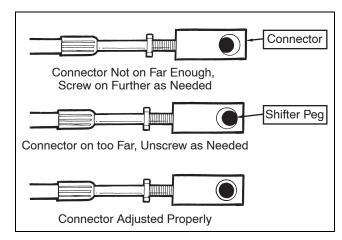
E-17. Cable Connector and Shifter Peg Alignment
